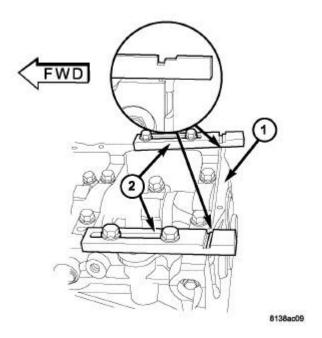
REAR CRANKSHAFT SEAL RETAINER ALIGNMENT Courtesy of CHRYSLER LLC
